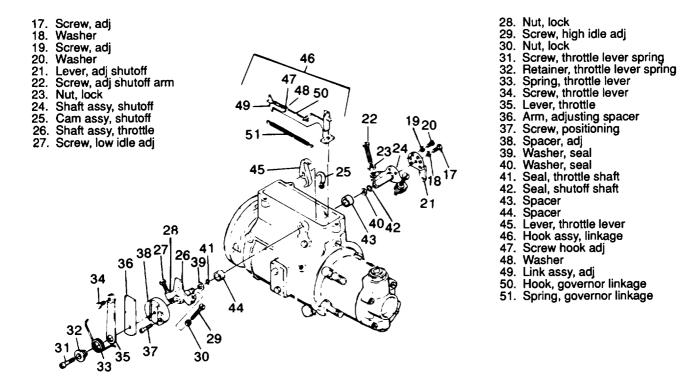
Fuel Injection Pump, Exploded View (Sheet 2 of 7)
